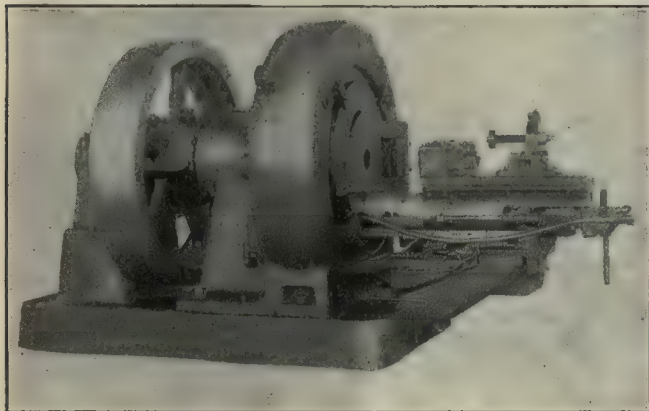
THE LANGELIER 8 HS 9 SWAGING MACHINE
